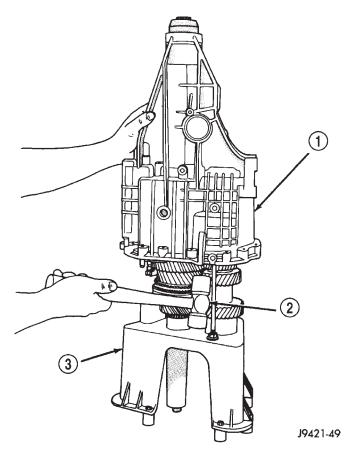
Unseating Rear Housing From Output Shaft Bearing—2WD
